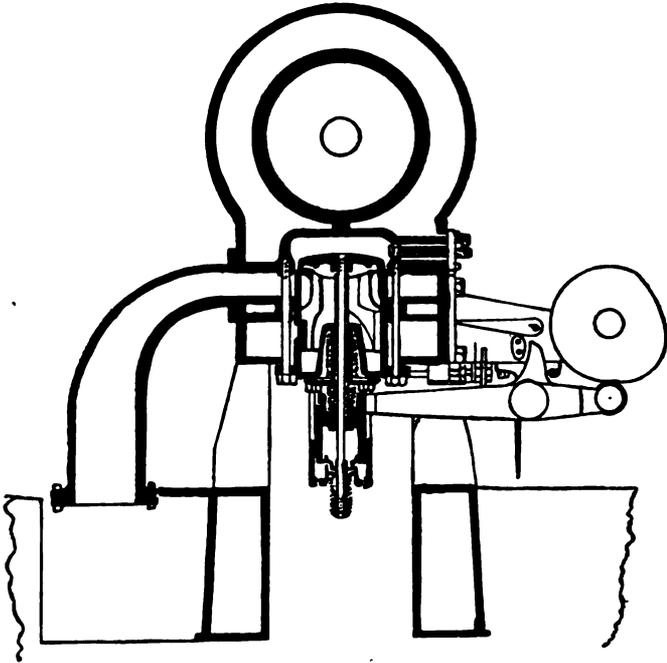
Sargent combined Inlet and Exhaust Valve.
